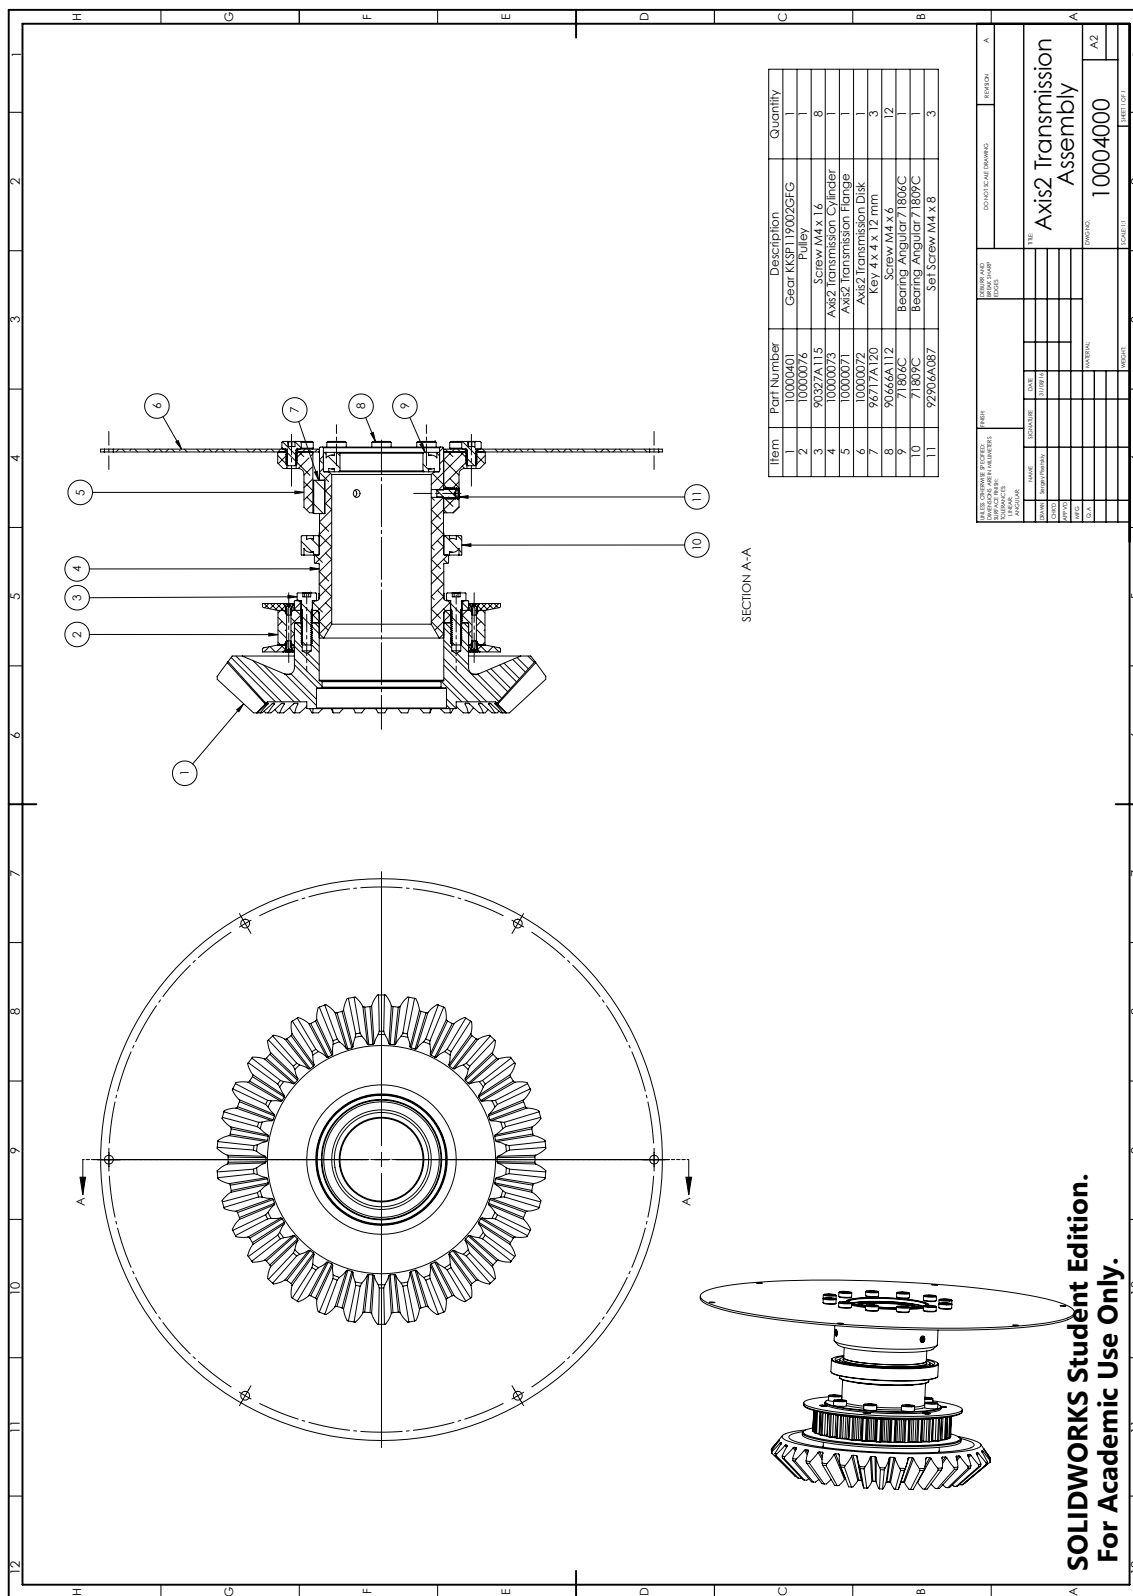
Drawing: Joint 2 bevel gear and pulley assembly.
